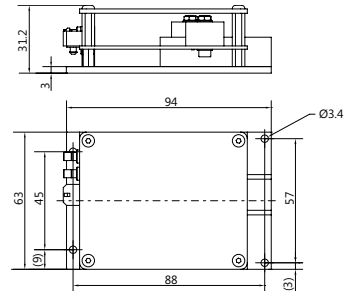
Outline drawing of DPD series drivers with conductive pad
